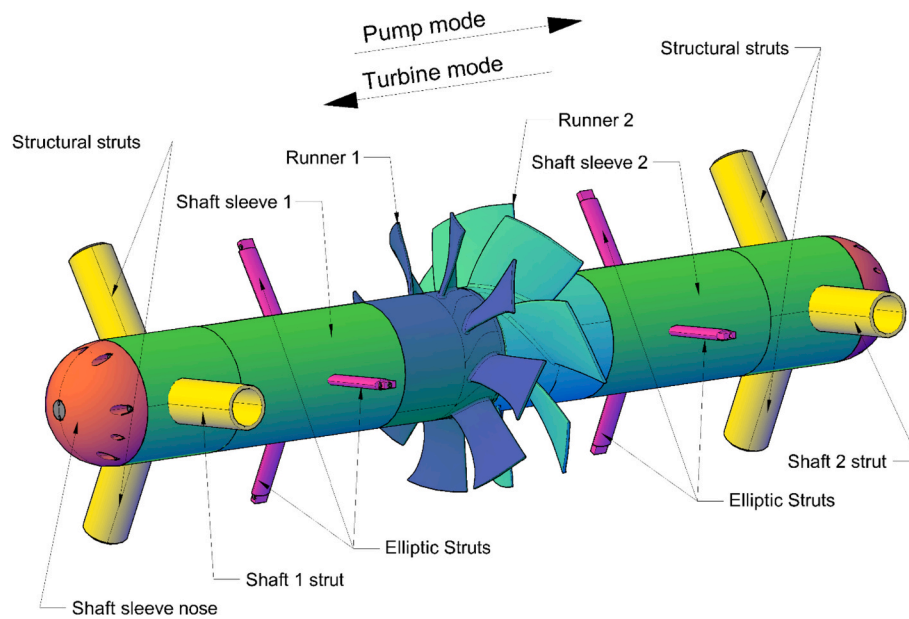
3D representation of the CR-RPT including its components. By colors: blue – Runner 1, cyan – Runner 2, yellow – structural and shaft struts (provide stability to the shaft and runner ensemble, and shaft struts also hosts the shaft connecting the bevel gears with the torque meter and thus the electric machines), magenta – elliptical struts (extra support, shaped elliptical to minimize turbulence), green – shaft sleeve (separates bearings, shaft from surrounding fluid), red – shaft sleeve nose. (For interpretation of the references to color in this figure legend, the reader is referred to the web version of this article.)
